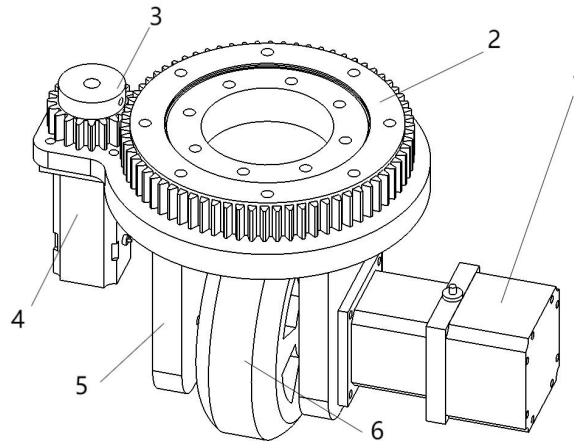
Schematic Diagram of the Steerable Drive Wheel Structure
